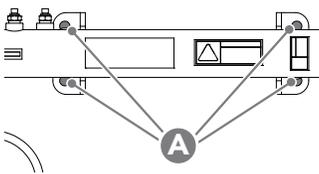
Modular DLV tank assembly .4 inch (10 mm) diameter mounting holes × 4 (A).
